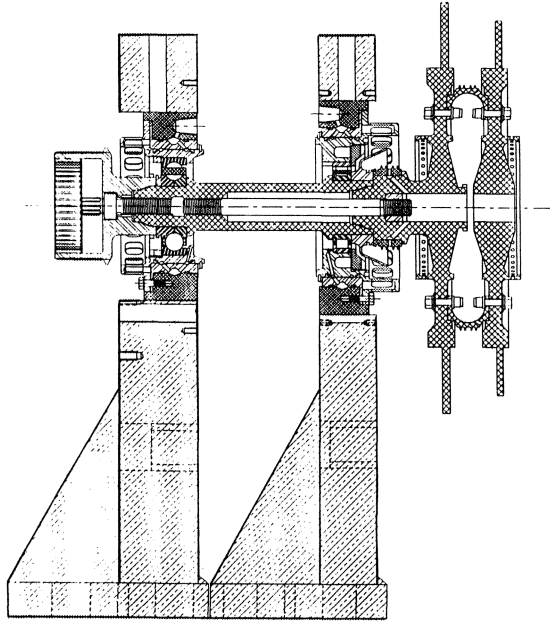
Power Turbine Rotor on Squirrel Cage Supports with Squeeze Films.
